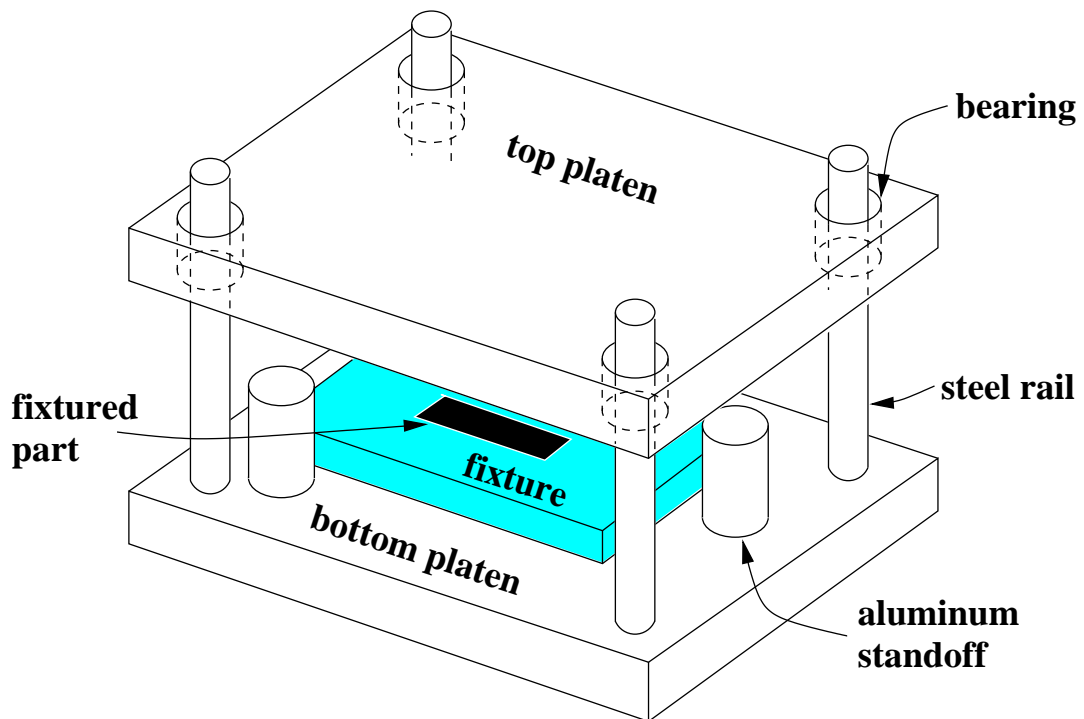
A drawing of the platens used to achieve high precision for SVX assembly.
